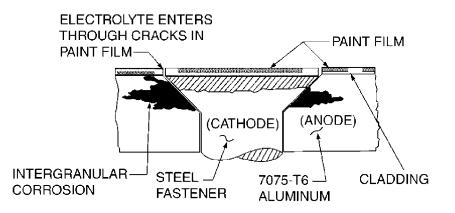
Intergranular Corrosion of a 7075-T6 Aluminum Alloy Adjacent to Steel Fastener
